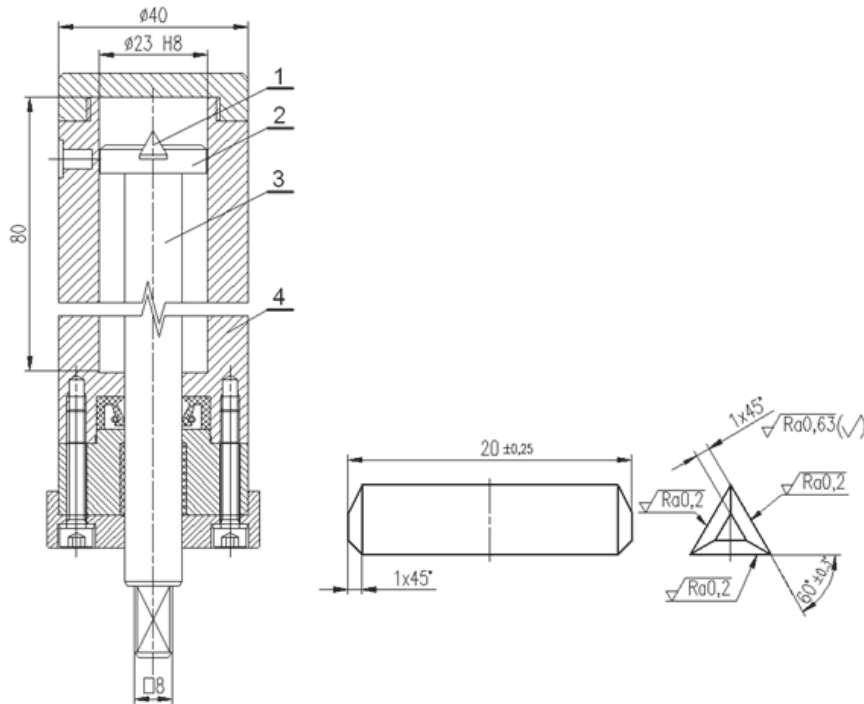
Cylindrical tribotester (a), and bar-specimen (b) with triangular cross-section, where: 1-specimen, 2-disc-specimen holder, 3-drive shaft, 4-cylindrical container
